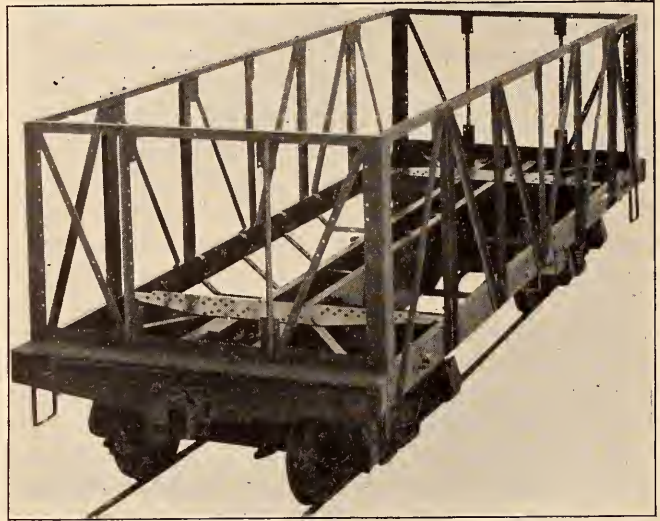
STEEL FRAMING OF HOPPER CAR.
